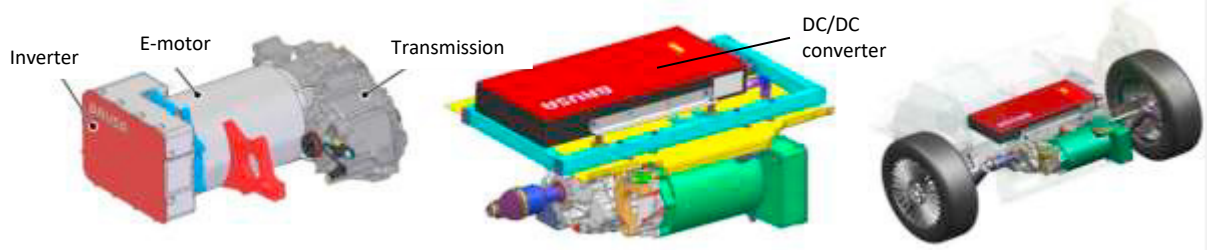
FITGEN inverter-e-motor-transmission mono-block (left), mono-block with DC/DC converter (centre) and e-axle mounted in A-segment rear-wheel driving configuration.
